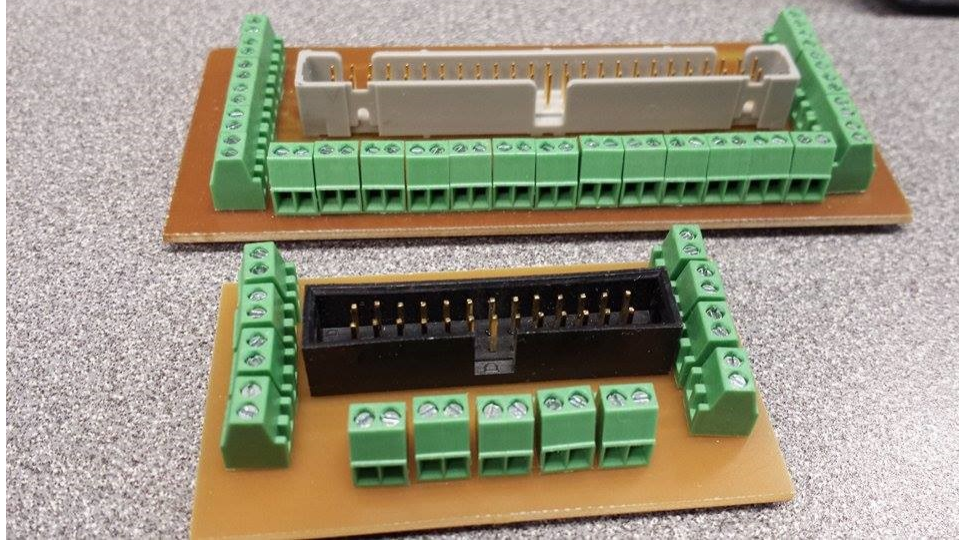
The 26 and 50 pin Breakout Boards with connectors for The Sensoray 826 I/O card
